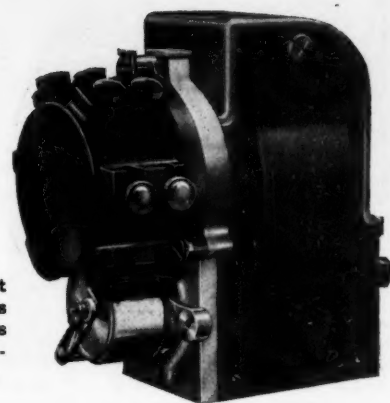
The latest Dixie magneto has its twelve terminals arranged on a compound distributor
